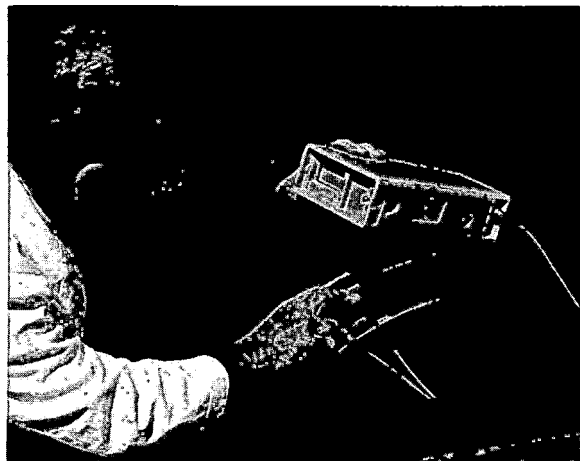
Prototype Ultra-sonic Wheel-Rim Flaw-Detection Unit.
